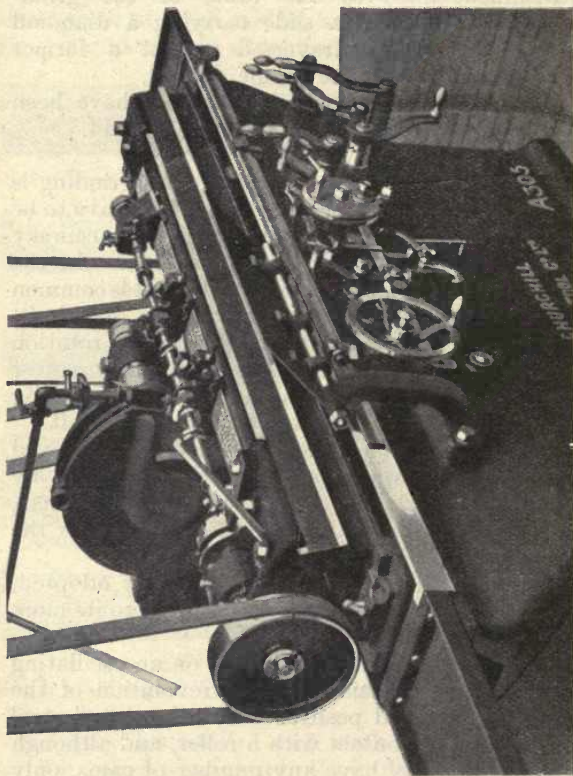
CAM GRINDING ATTACHMENT ON CHURCHILL PLAIN GRINDER
